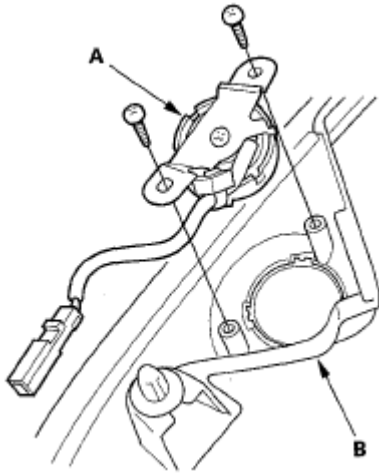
Identifying Tweeter Speaker And Quarter Inner Trim
